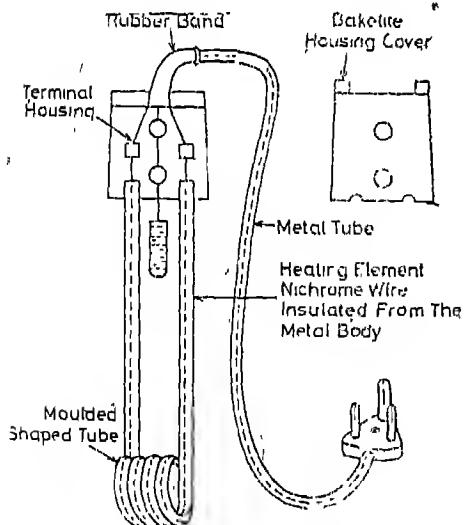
(d) Parts of Immersion Heater Moulded Make.
